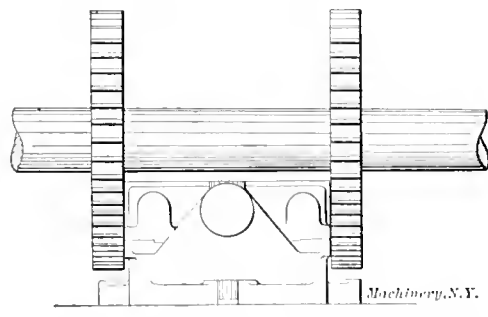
Finishing the Sides of Base and Movable Jaw.
